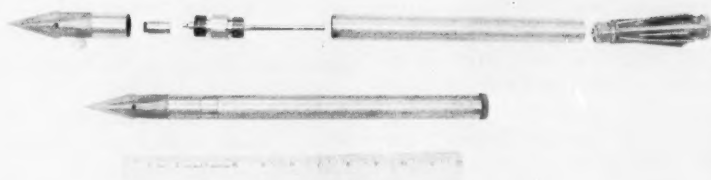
Expanded view of bomb used in shoulder guns. Bomb fired from darting gun (bottom) is identical except it is about 8 cm (3 inches) shorter because flight-vanes are not needed.
